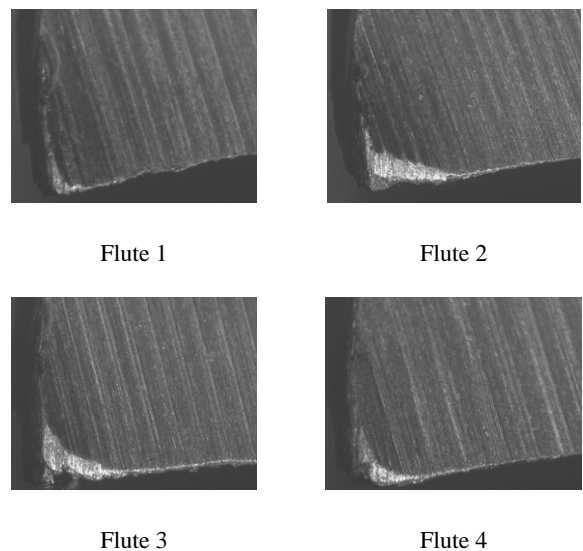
Flank wear under MQL cutting at cutting speed of 10 m/min 10 min
